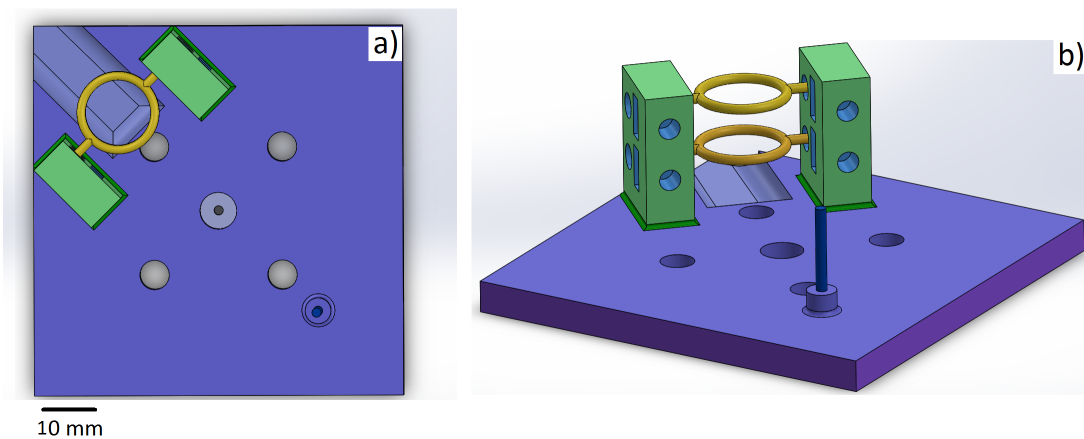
Board that holds the wire compartment and rings for the chemical etching process; a) top view and b) side view.
